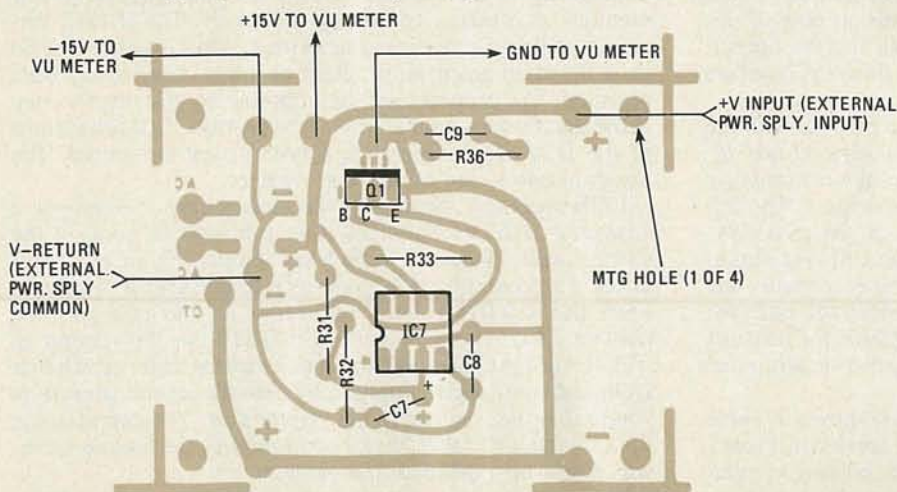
PARTS FOR THE POWER SUPPLY are positioned on the board as shown when using a 24-to-30-volt DC external supply.
